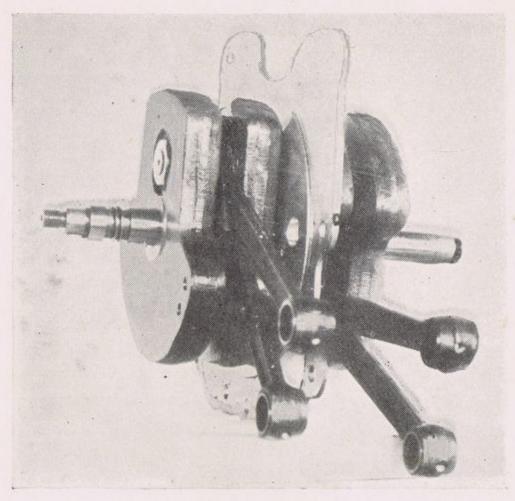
THE "SILVER HAWK" CRANKSHAFT ASSEMBLY
